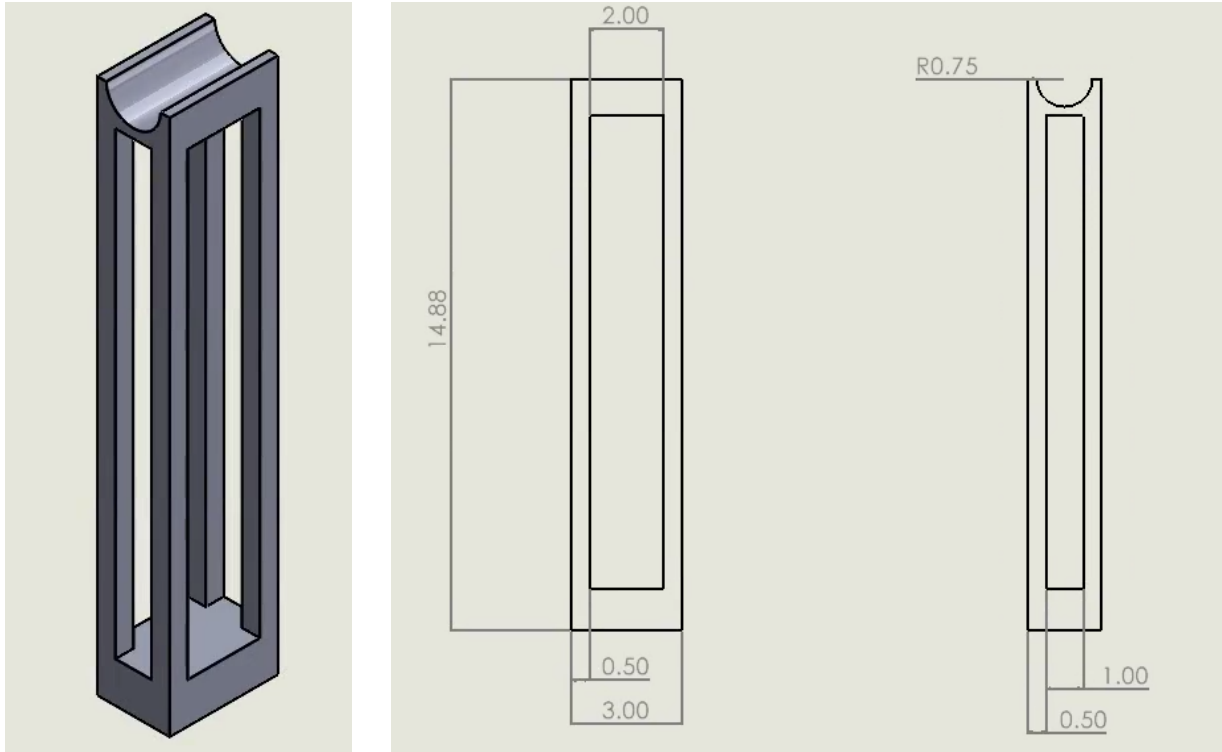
Dimensioned drawing of PETG support developed to support weight of MFC fittings. Dimensions in inches.
